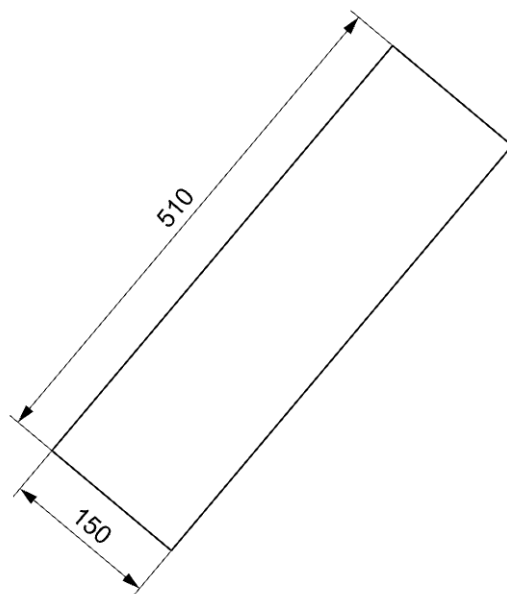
"45 (right)" carbon fibre cutout for the front inner and rear wheel shells.
